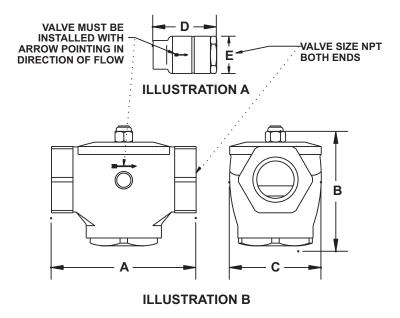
Check Valves, 1/2-inch through 2-inch
